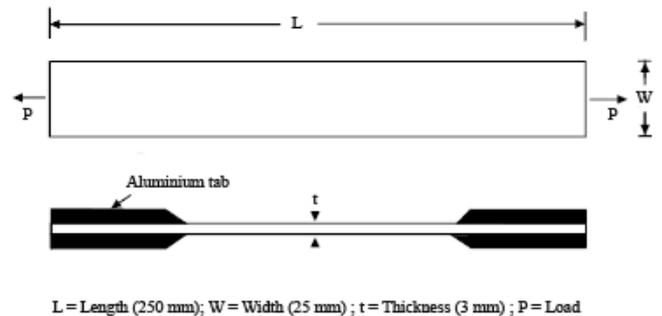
Dimensions of the tensile test specimen (ASTM D3039)
